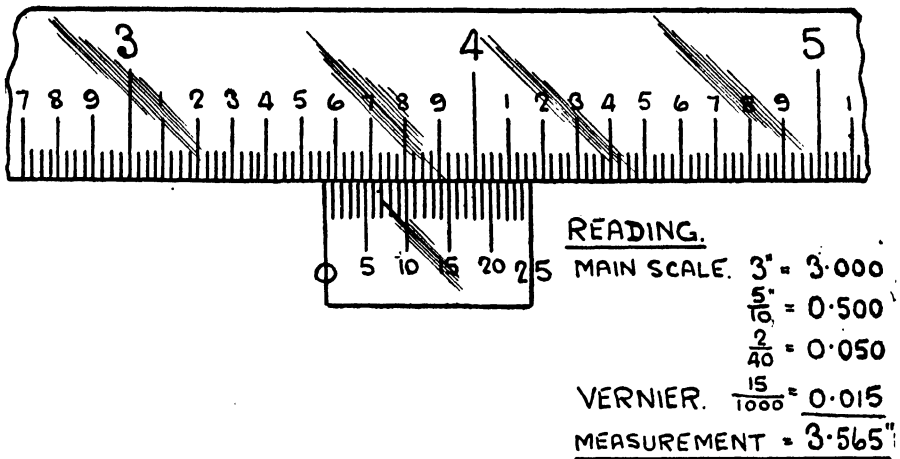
EXAMPLE OF READING 1000TH VERNIER CALIPER
